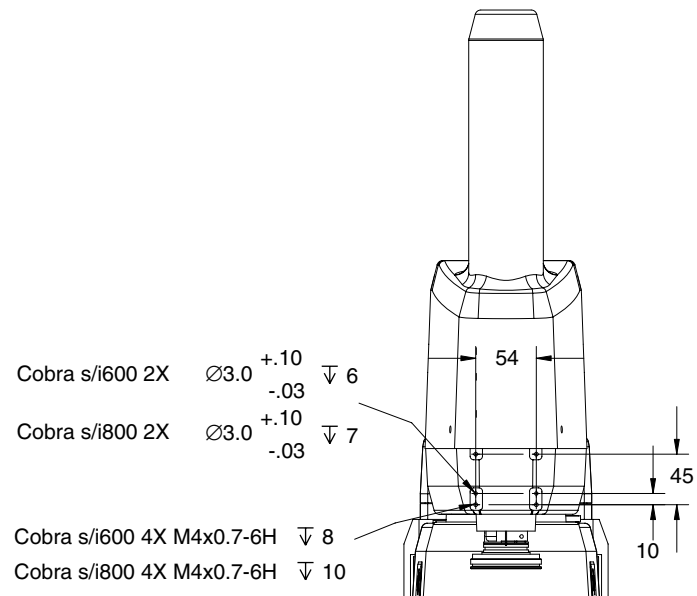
Dimensions of the Camera Bracket Mounting Pattern
